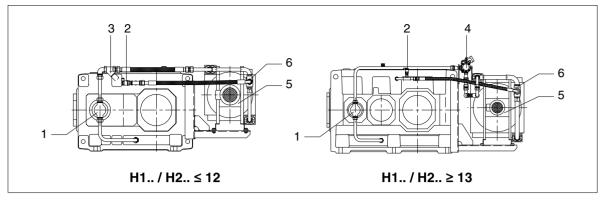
Air oil-cooling system on gear units types H1.. and H2..
